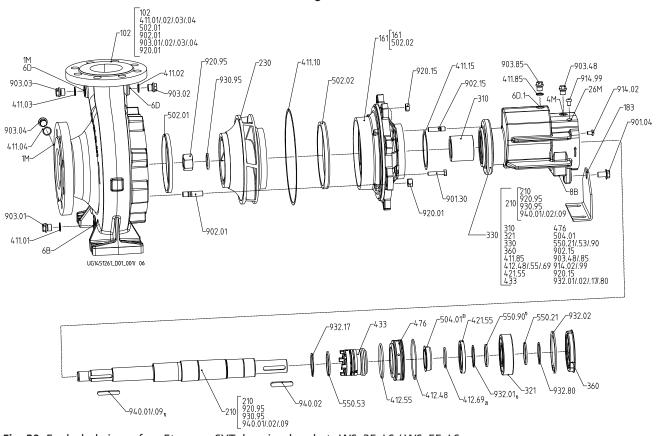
Exploded view of an Etanorm SYT, bearing brackets WS\_35\_LS / WS\_55\_LS
